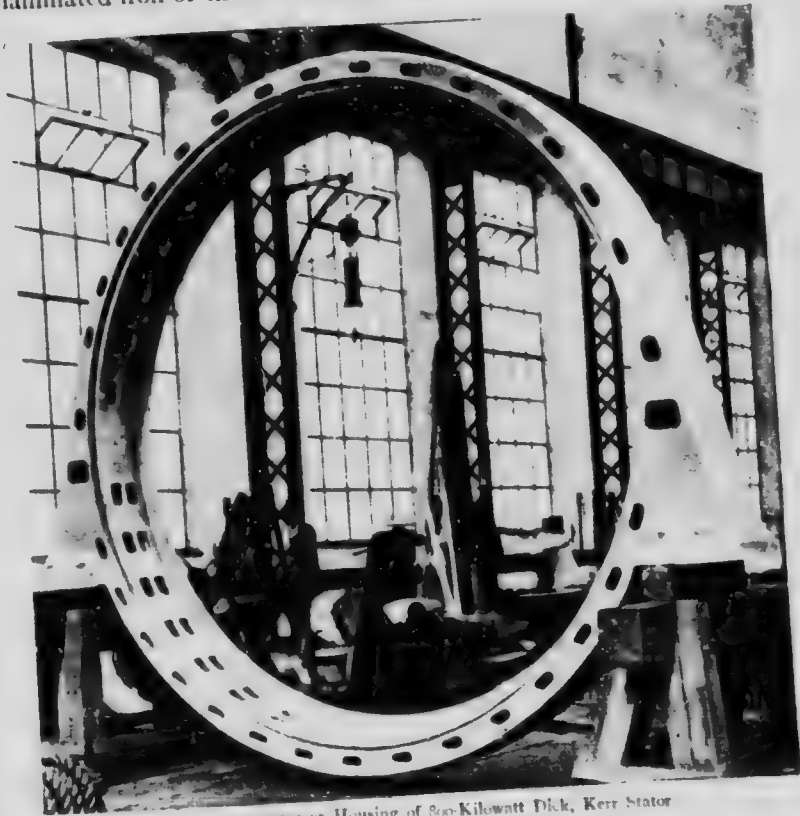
Frame or Housing of 800-Kilowatt Dick, Kerr Stator
